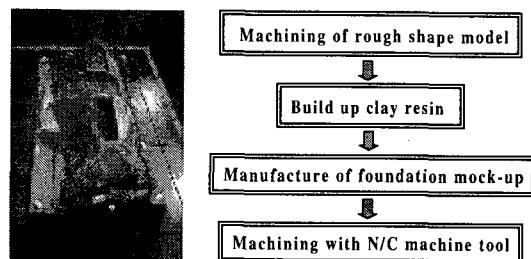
Mock-up making procedure & Completed mock-up for Hybrid RIM
